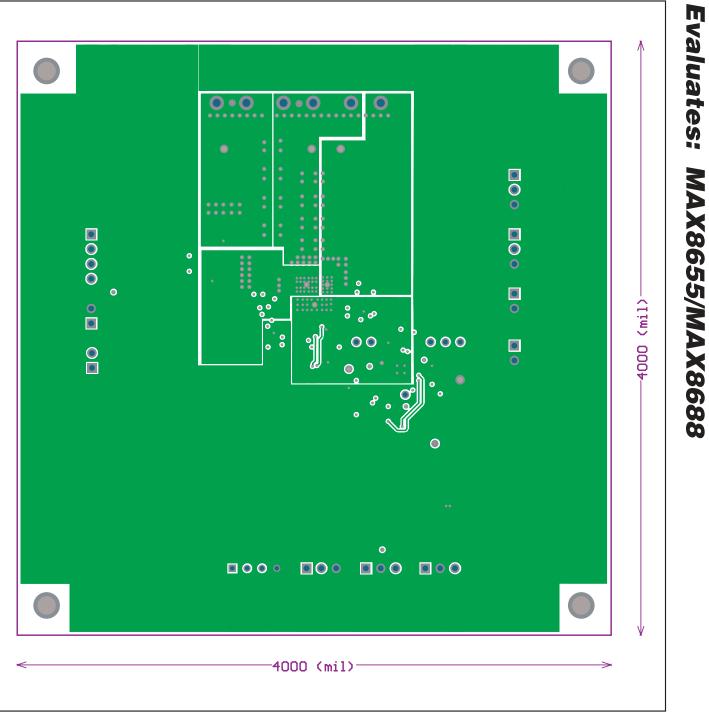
MAX8655 EV Kit PCB Layout—Inner Layer 2
